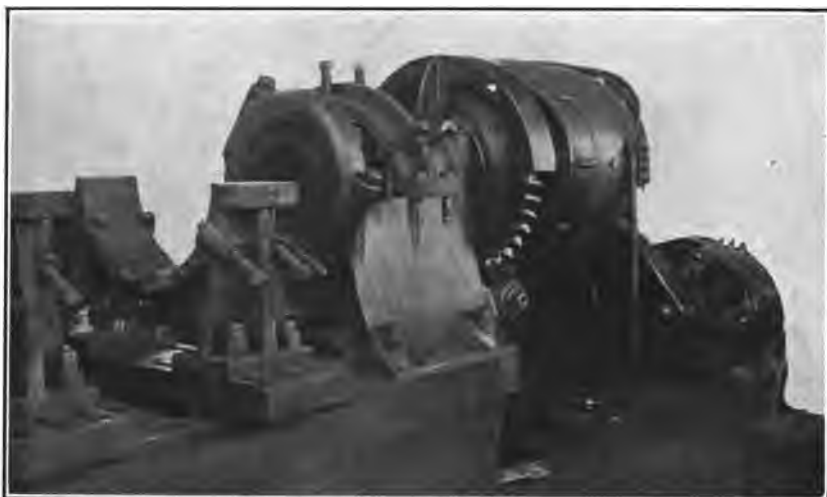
THE RECONSTRUCTED MACHINE. THE CAPACITY OF THE MACHINE WAS DOUBLED BY THE IMPROVEMENTS MADE, AND THE ORIGINAL MOTOR WAS REPLACED BY ONE OF TWICE THE HORSEPOWER.
